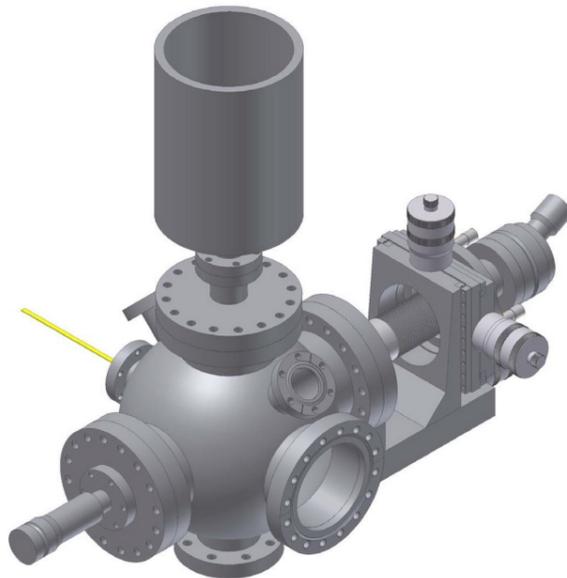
An outer view of the vacuum chamber. (Aprile et al., 2009)
